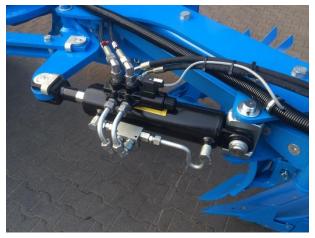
6/2 hydraulic valve mounted on the width regulation cylinder
